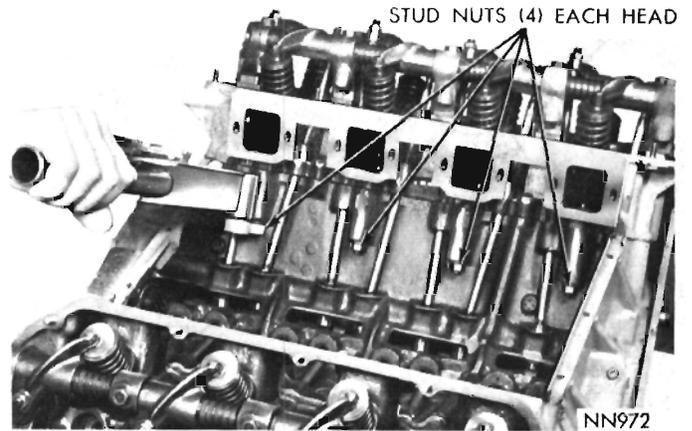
Removing or Installing Cylinder Head Stud Nuts
